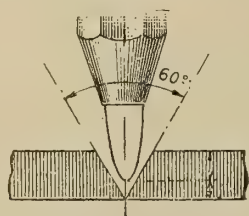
POSITION OF THE TORCH, TIP OF FLAME IN ANGLE FORMED BY THE CHAMFERS
